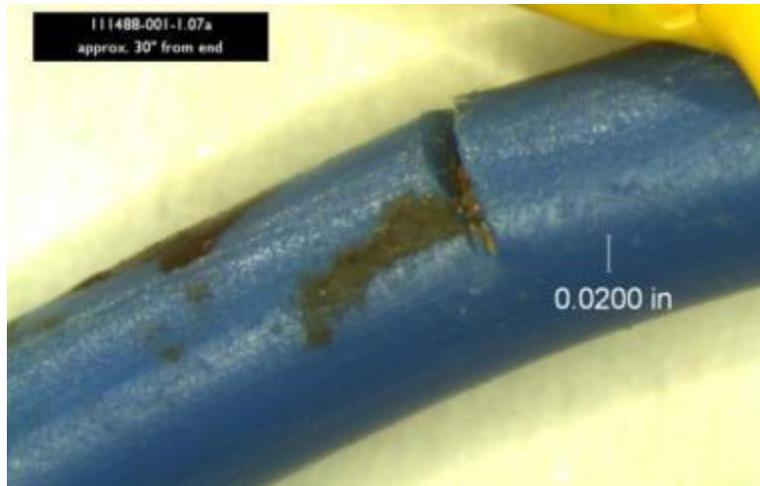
Break of Insulation Jacket (#1) on Field Tested Company D-12 AWG Copper Clad Steel Wire
